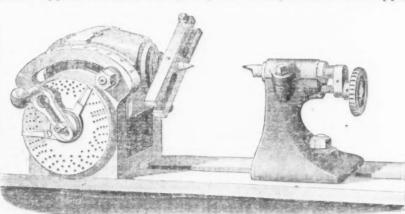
The Garvin Dividing Head for Milling Machines.
